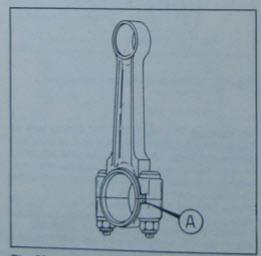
A = Match mark Insert piston into bore from top, lubricate and enter rings with the aid of a ring compressor
